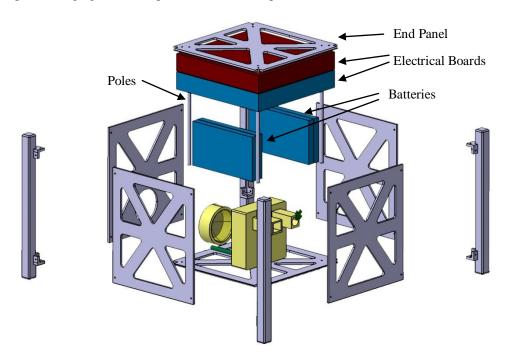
Expanded view of payload support system with two removable electrical boards and batteries.
